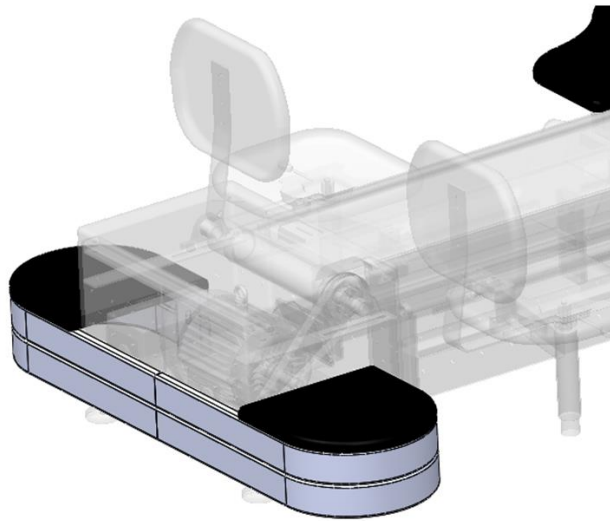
Front Stabilizing Deck with Steps to Treadmill Motor Housing Platform
